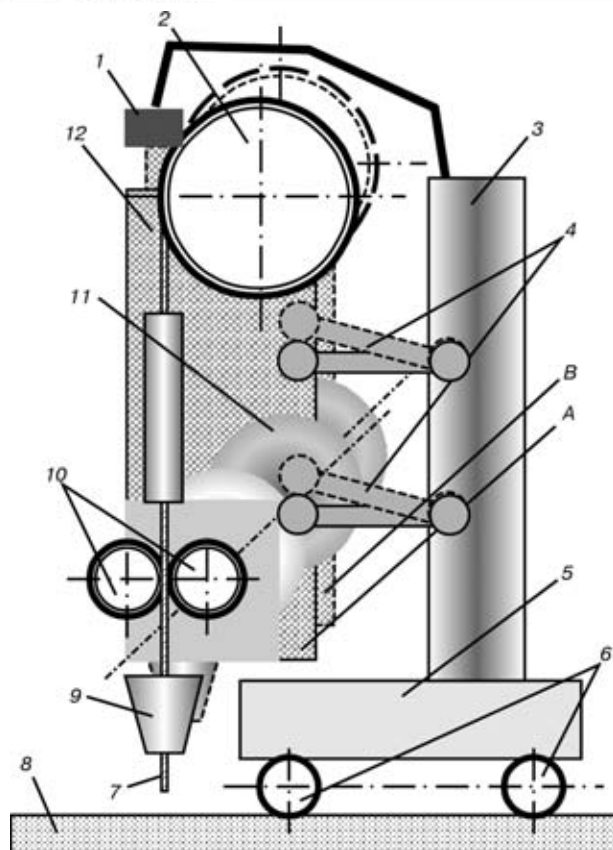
Fragment of a system of arc excitation under the flux: 1 — sensor; 2 — reel with electrode wire; 3 — post; 4 — casing suspension; 5 — carriage; 6 — drive of displacement of the automatic device; 7 — electrode wire; 8 — welded item; 9 — current-conducting tip; 10 — feed and press-down roller; 11 — feed mechanism electric motor; 12 — casing with feed mechanism
